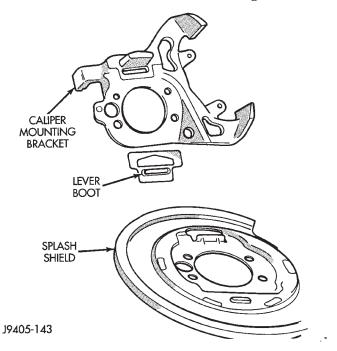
Caliper Bracket, Splash Shield And Lever Boot
